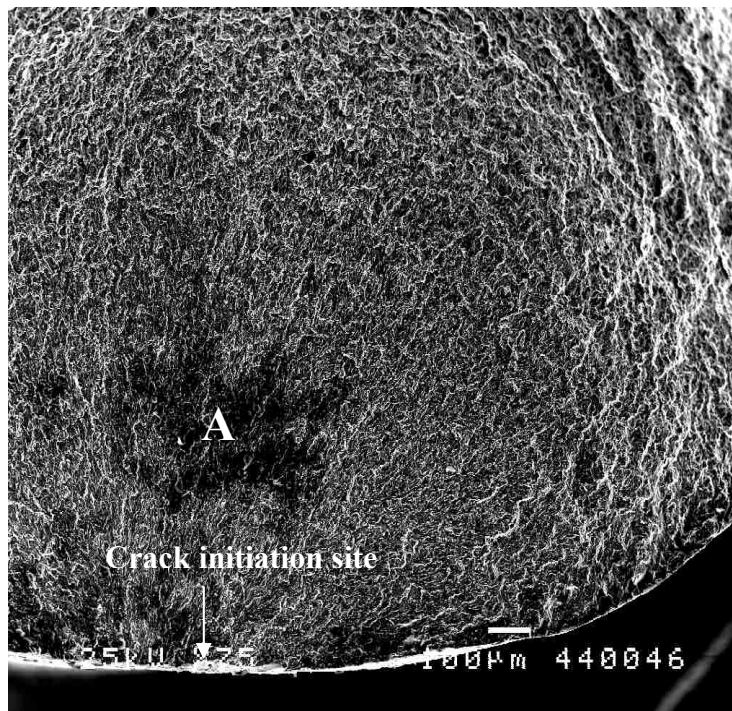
SEM photograph of the slant fracture of sample C'1, showing shear dimples due to final tensile overloading.
